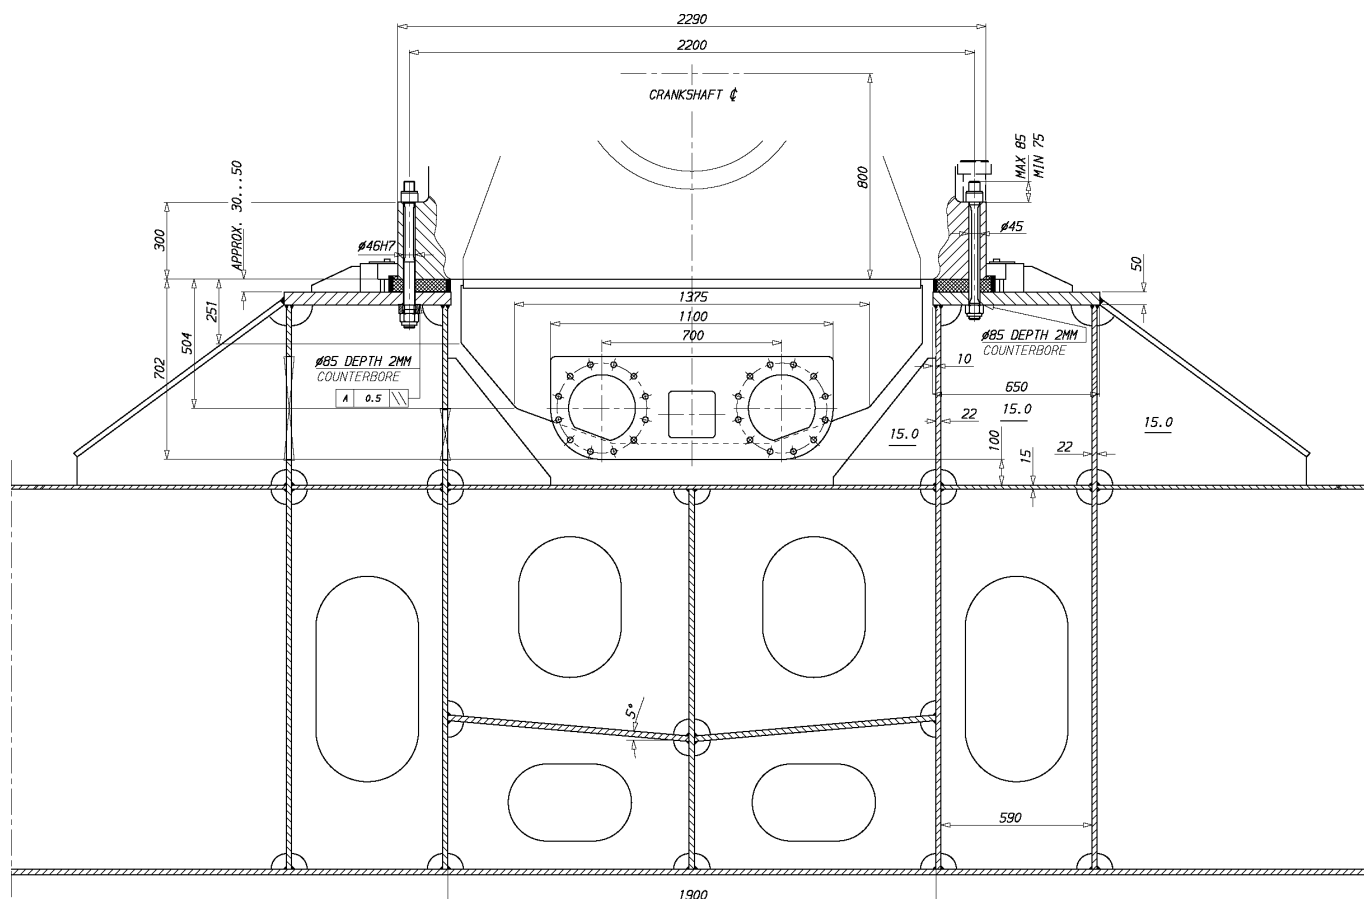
Seating and fastening, rigidly mounted in-line engine on resin chocks (1V69L0082c)
